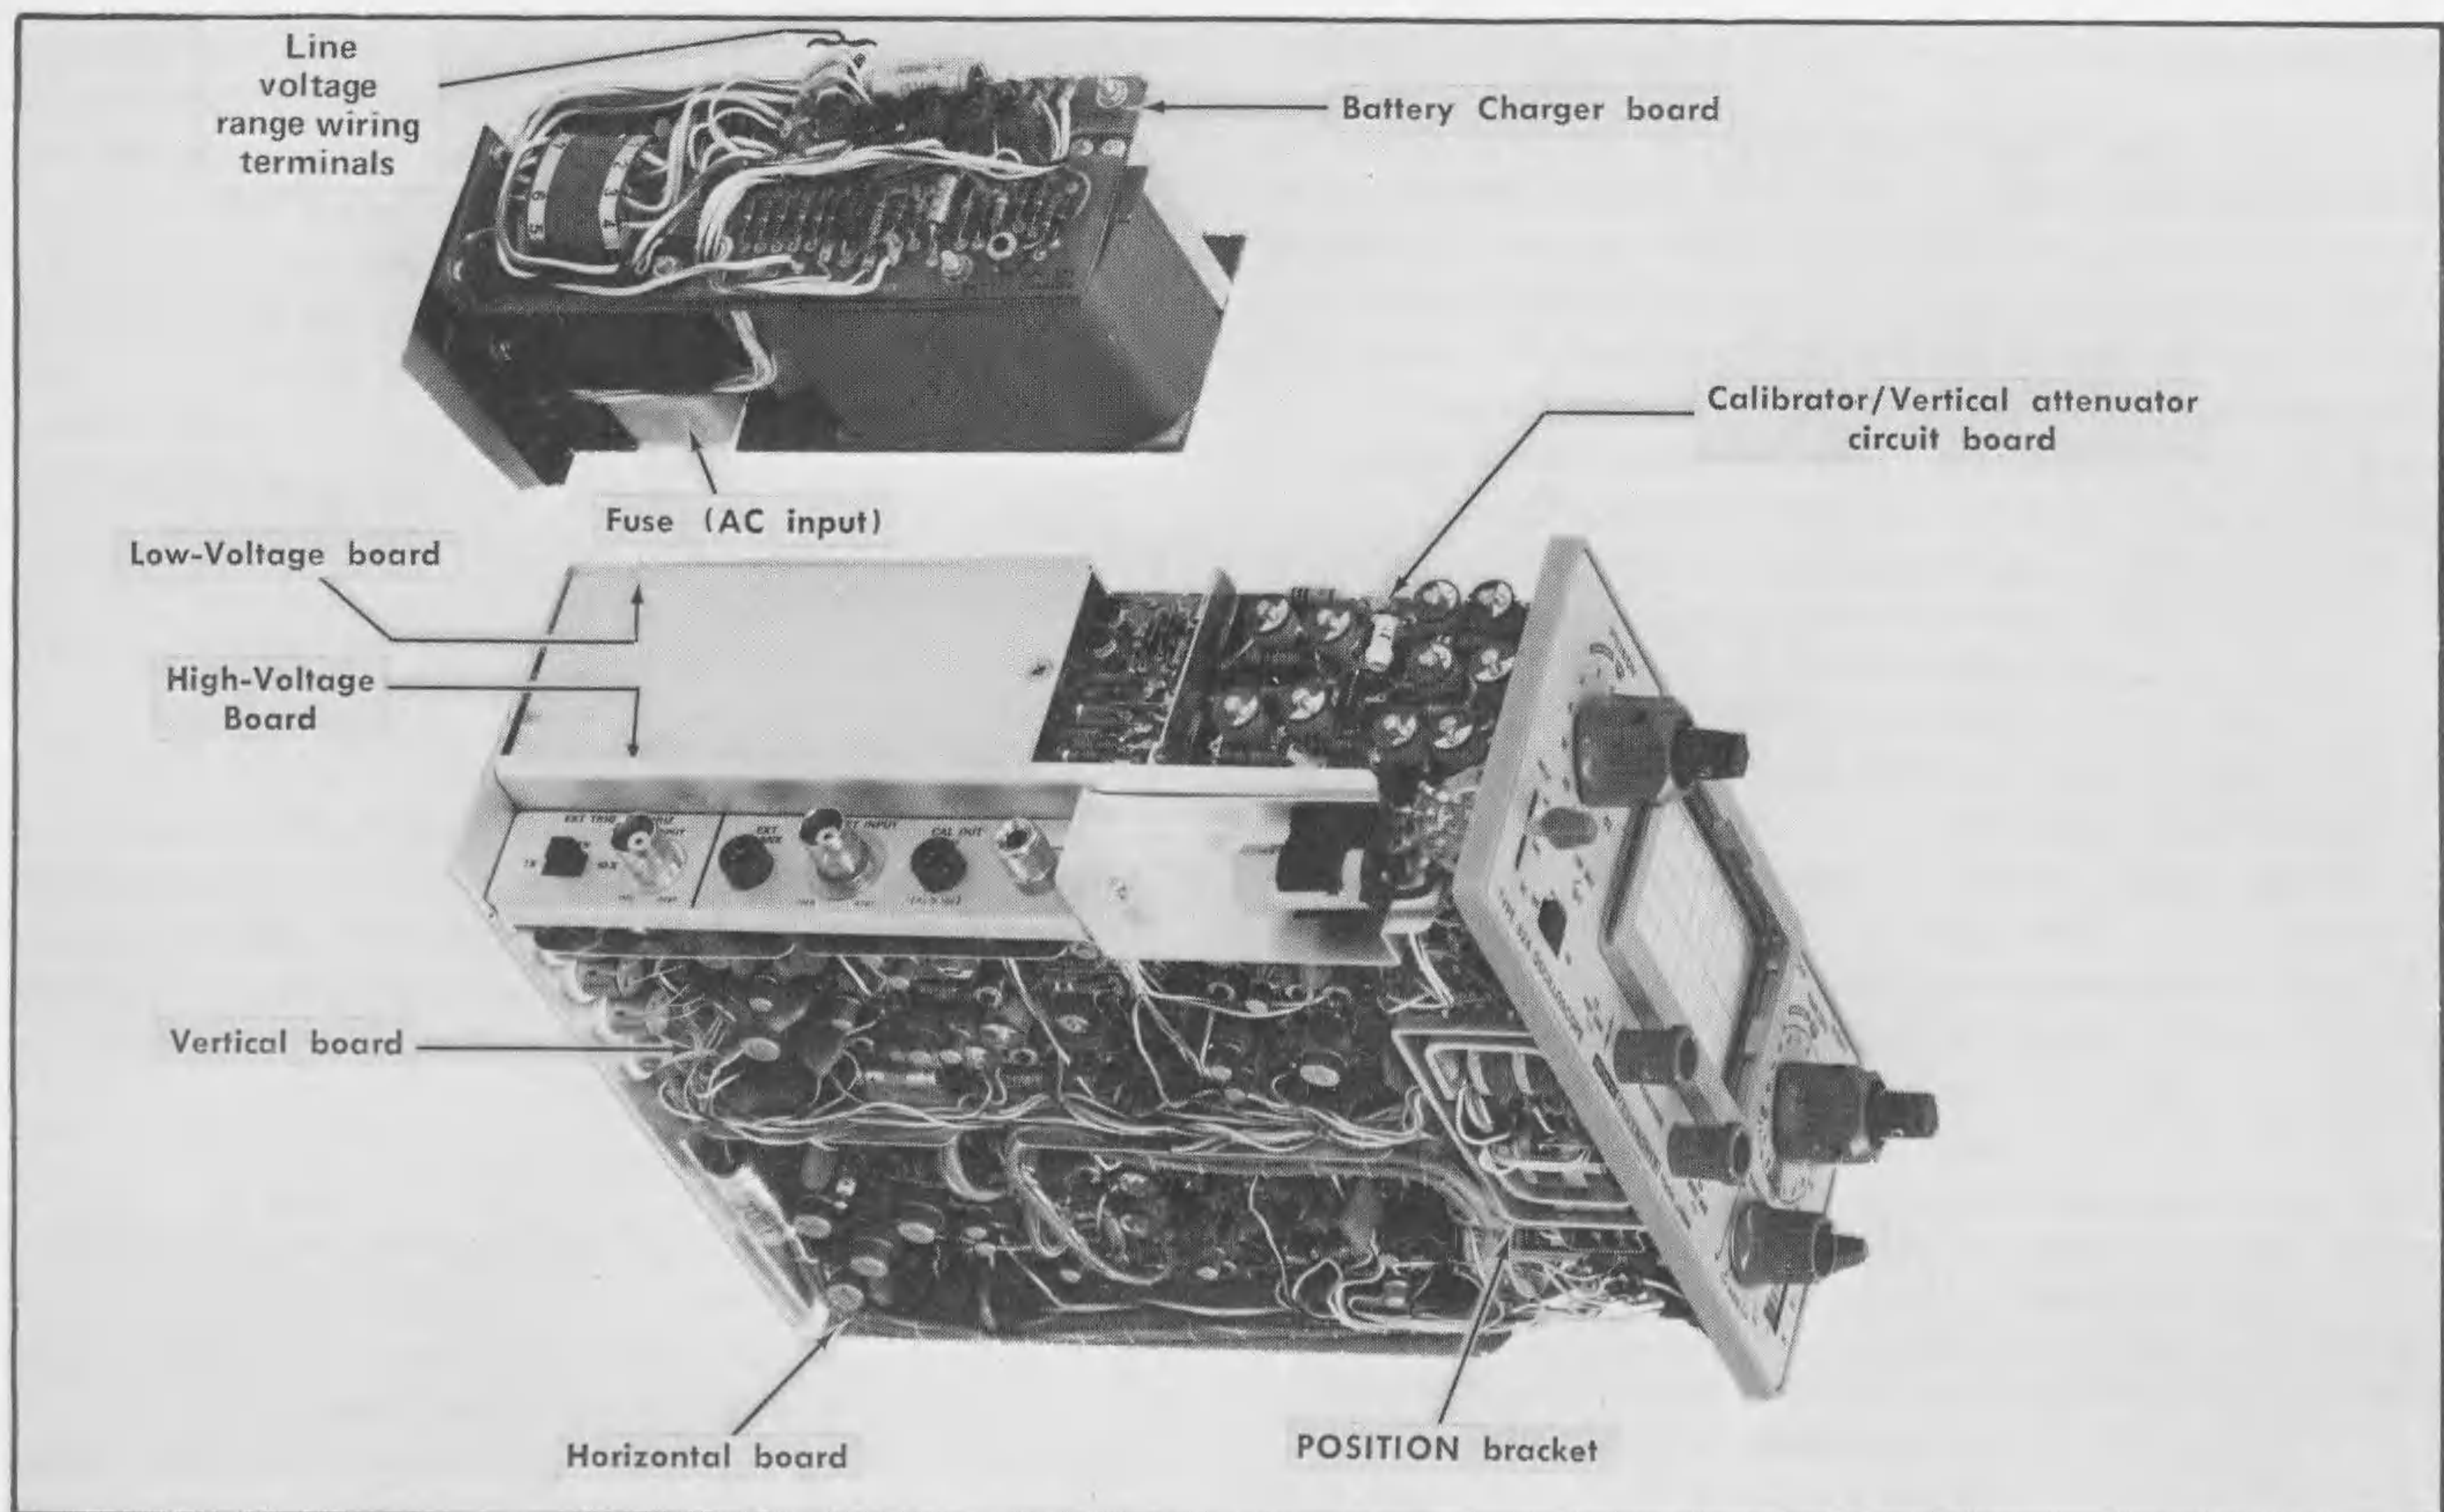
Location view; bottom of oscilloscope and Power Pack.
